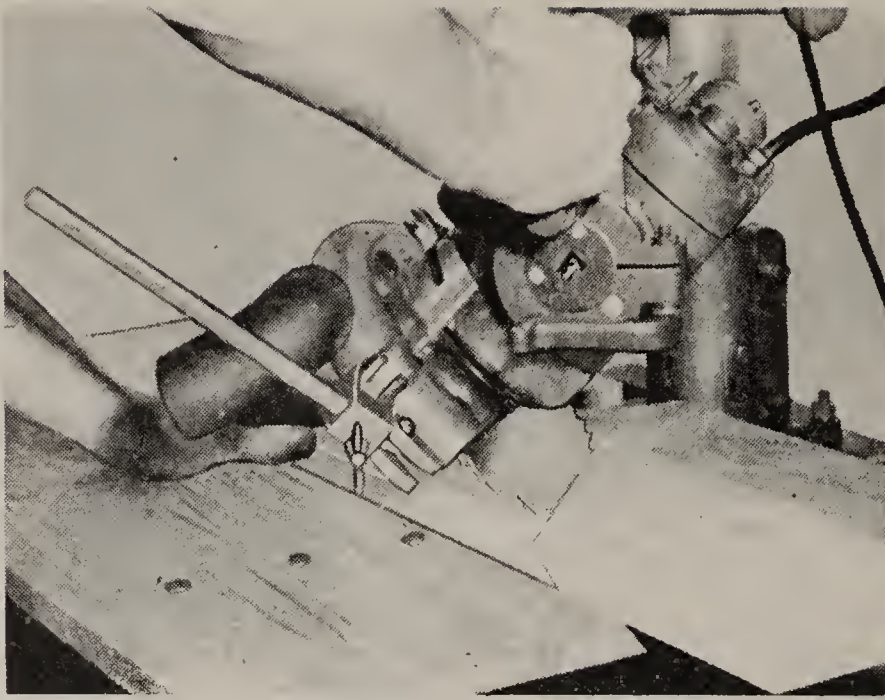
Compound miter cut with the radial-arm saw. To make a compound miter cut, the saw must be first set for bevel cutoff. Then release the arm latch and the clamp handle and swing the arm into the desired mitering position, following the same routine as for making miter cuts. Follow normal operating procedure as described under crosscutting.
